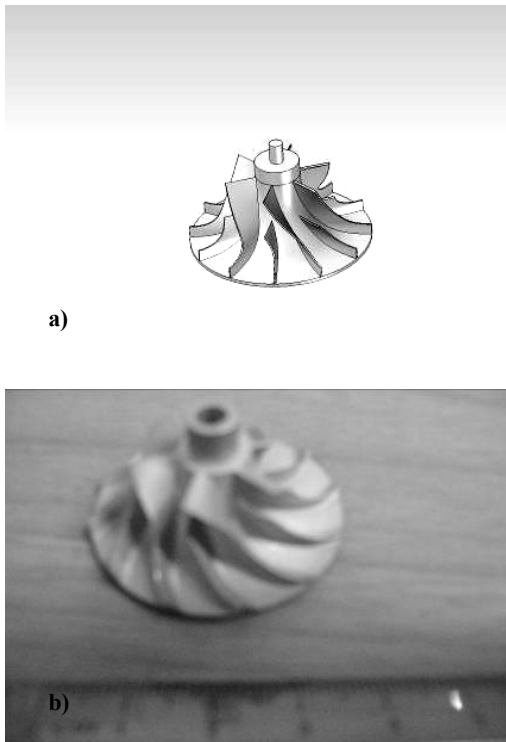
UMGTG-UDR 1: Compressor – a) PC design layout, b) impeller
